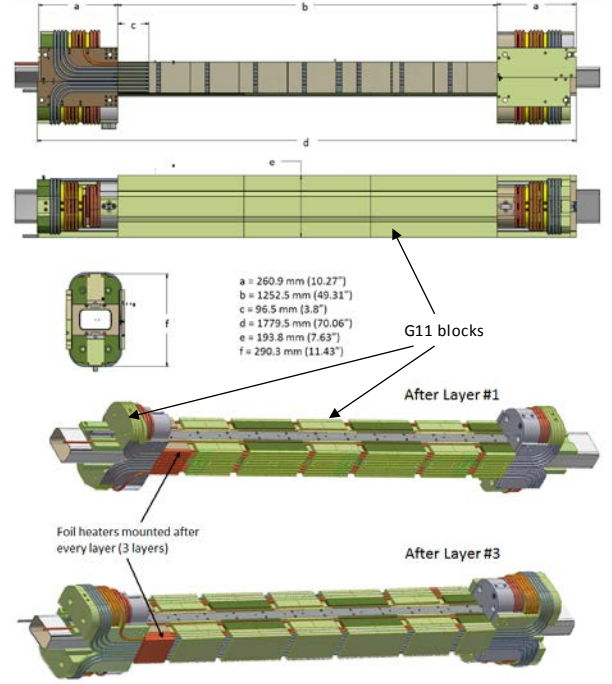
Typical overall dimensions of the 1.2 m dipole showing the foil heater mounting locations after every layer.
